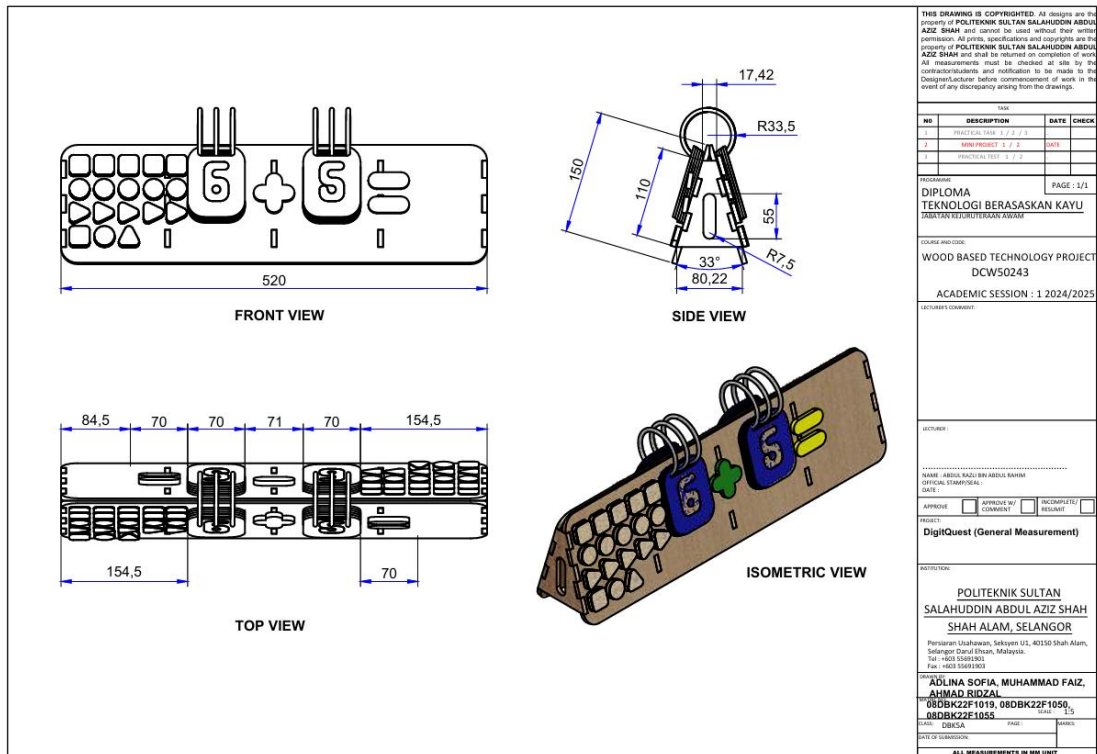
Technical drawing of redesigned DigitQuest (A3 size; 1:5)
